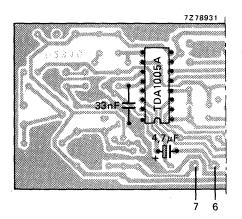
Printed-circuit board component side, showing component layout of Fig. 13.
